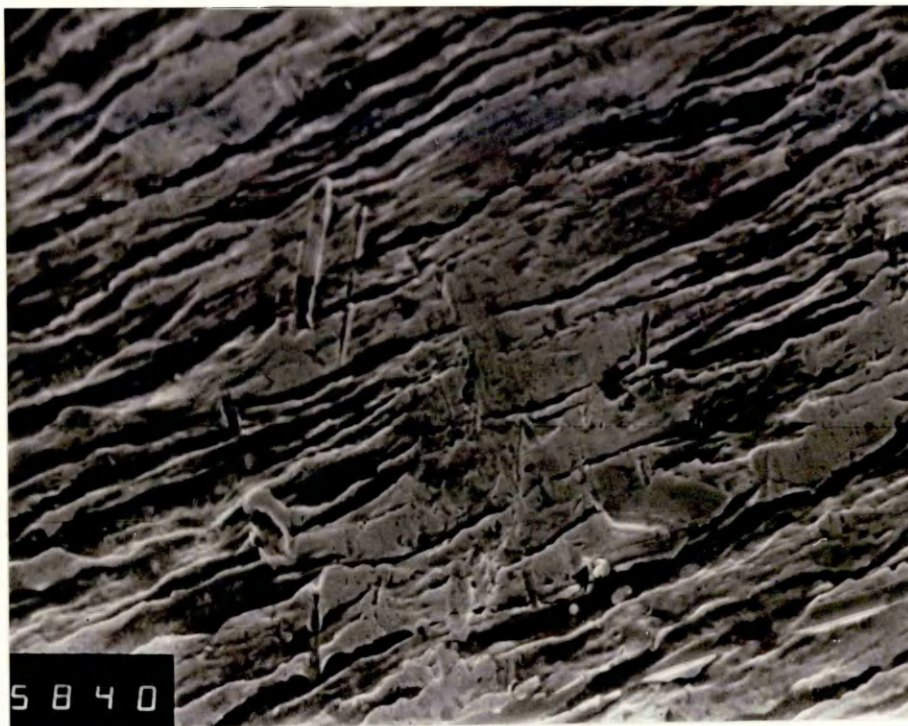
SURFACE FINISH OF 18/8 STAINLESS STEEL
